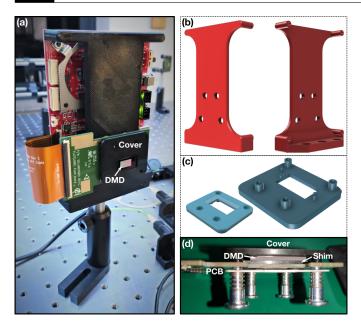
A photo of the completed unit (a), with renderings of the 3D printed mount (b) and DMD cover (c). The key component is the cover, which has several alignment pins to hold the DMD, inter-poser shim and PCB in exact position (d).
